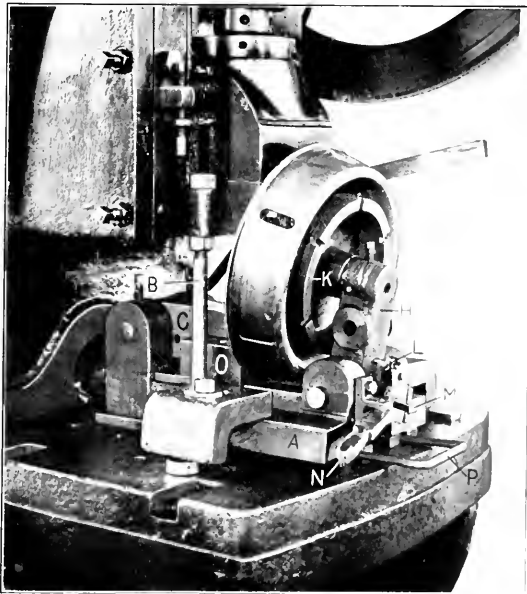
Slotting Fixture shown in Fig. 6 set up in a Punch Press ready for Action
